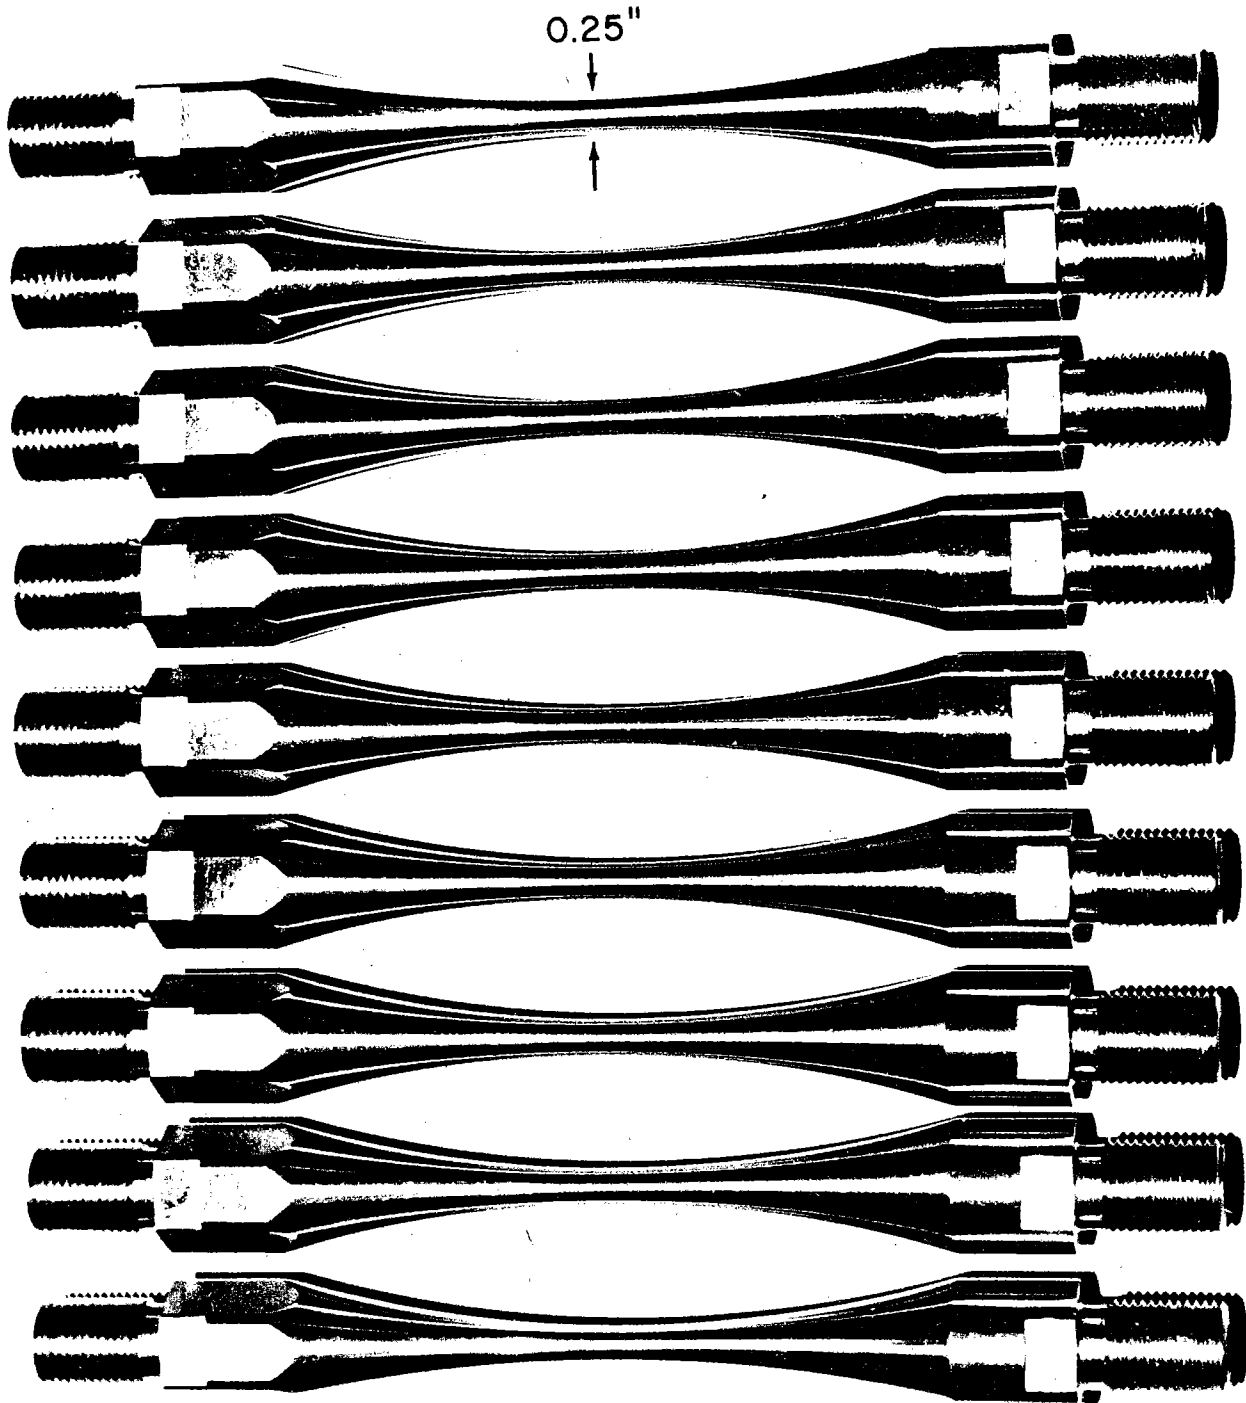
Photograph showing several typical AISI 4340 steel test specimens.
